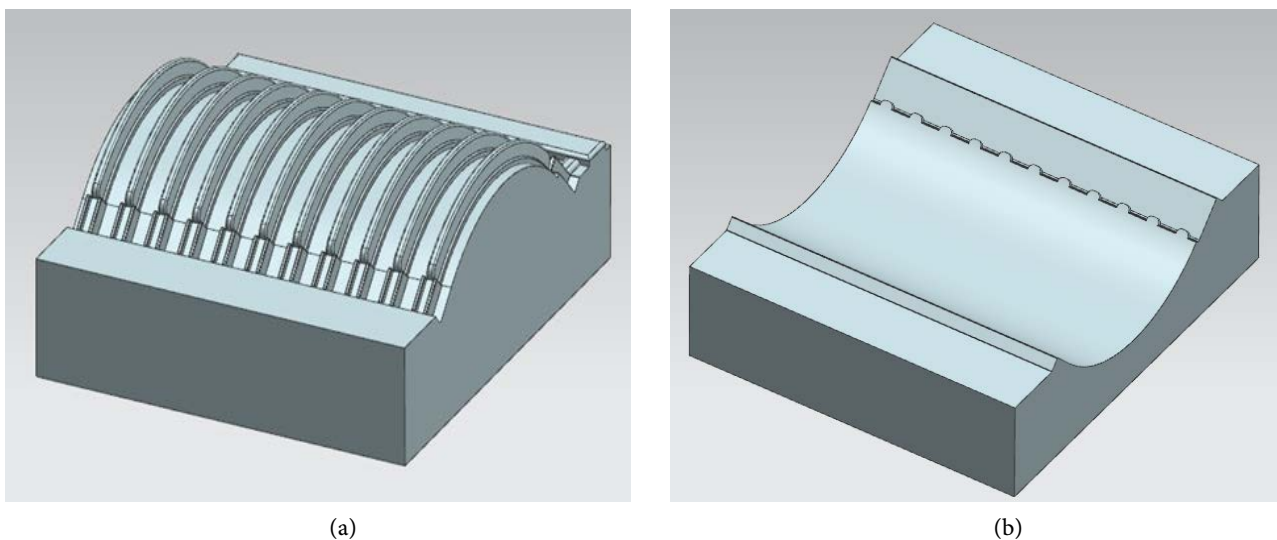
Casting mold from aluminum. (a) Stamping punch; (b) Former block.
